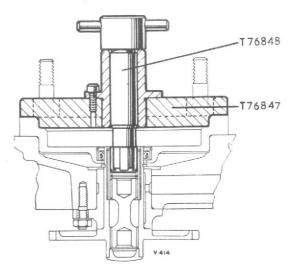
Checking the concentricity of the generator and alternator gear bores
